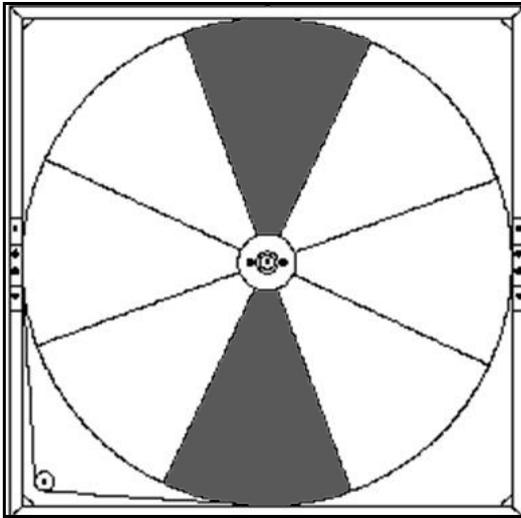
Remove or install opposing segments to minimize wheel imbalance.
